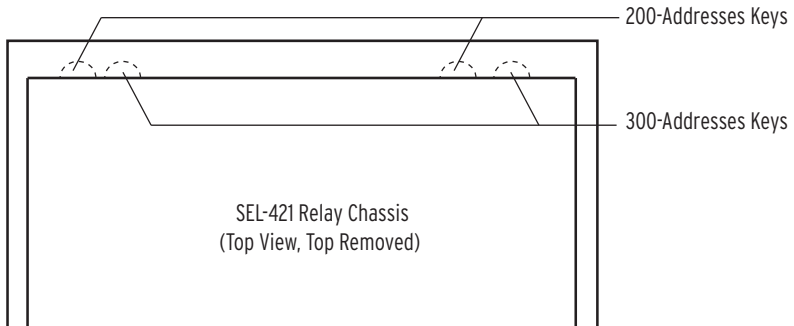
Chassis Key Positions for I/O Interface Boards
